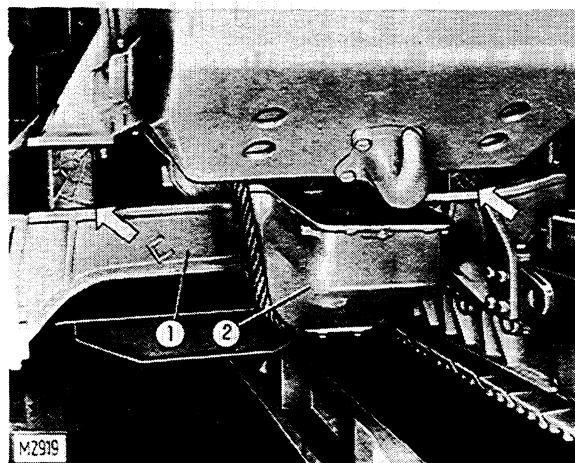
Removing or installing oil pan with engine on FL 14-C crawler loader.
